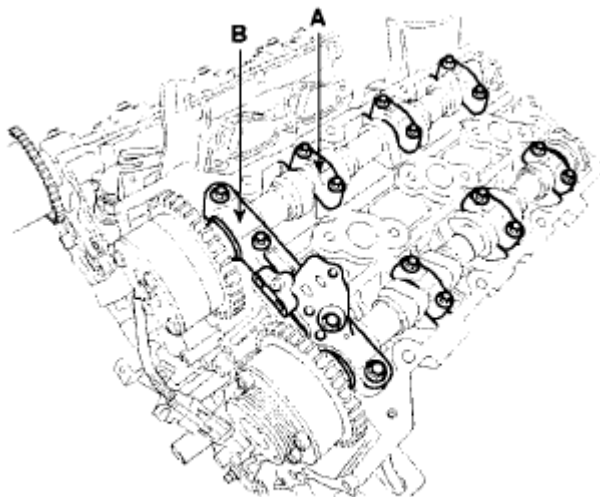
Identifying LH Exhaust Camshaft OCV (A)
